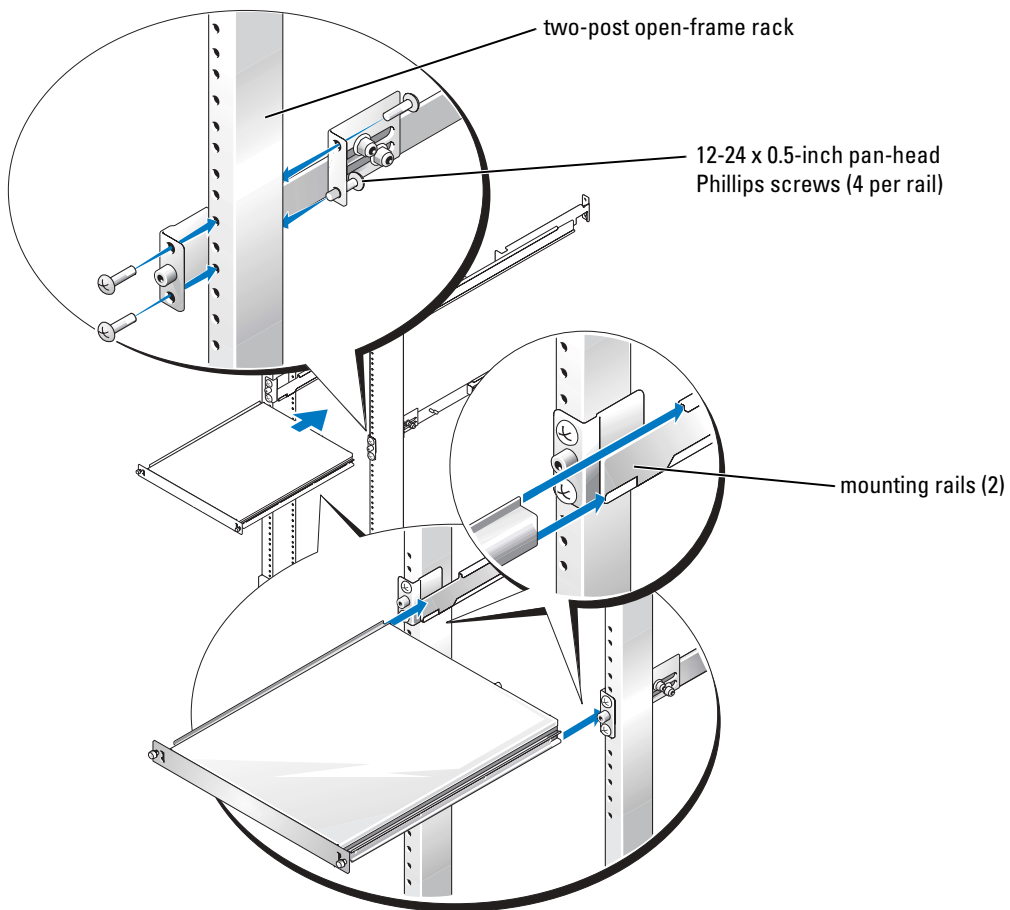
Configuring the Adjustable Mounting Bracket for Flush-Mount Installation
